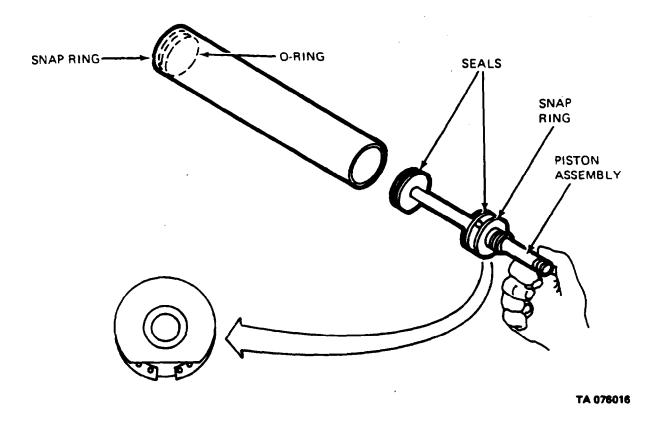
Disassemble/Assemble Bar Shifting Control Cylinder.
